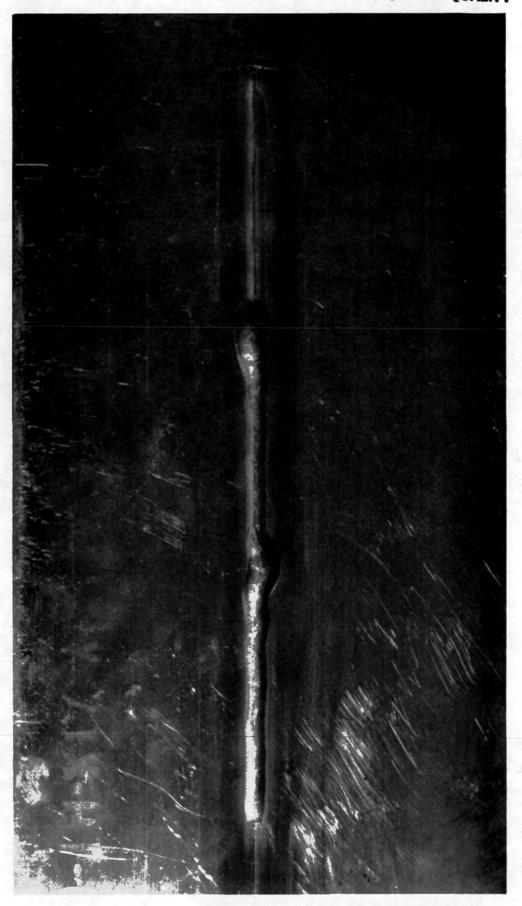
Back view photograph of test sample welded with optimal control parameters.
